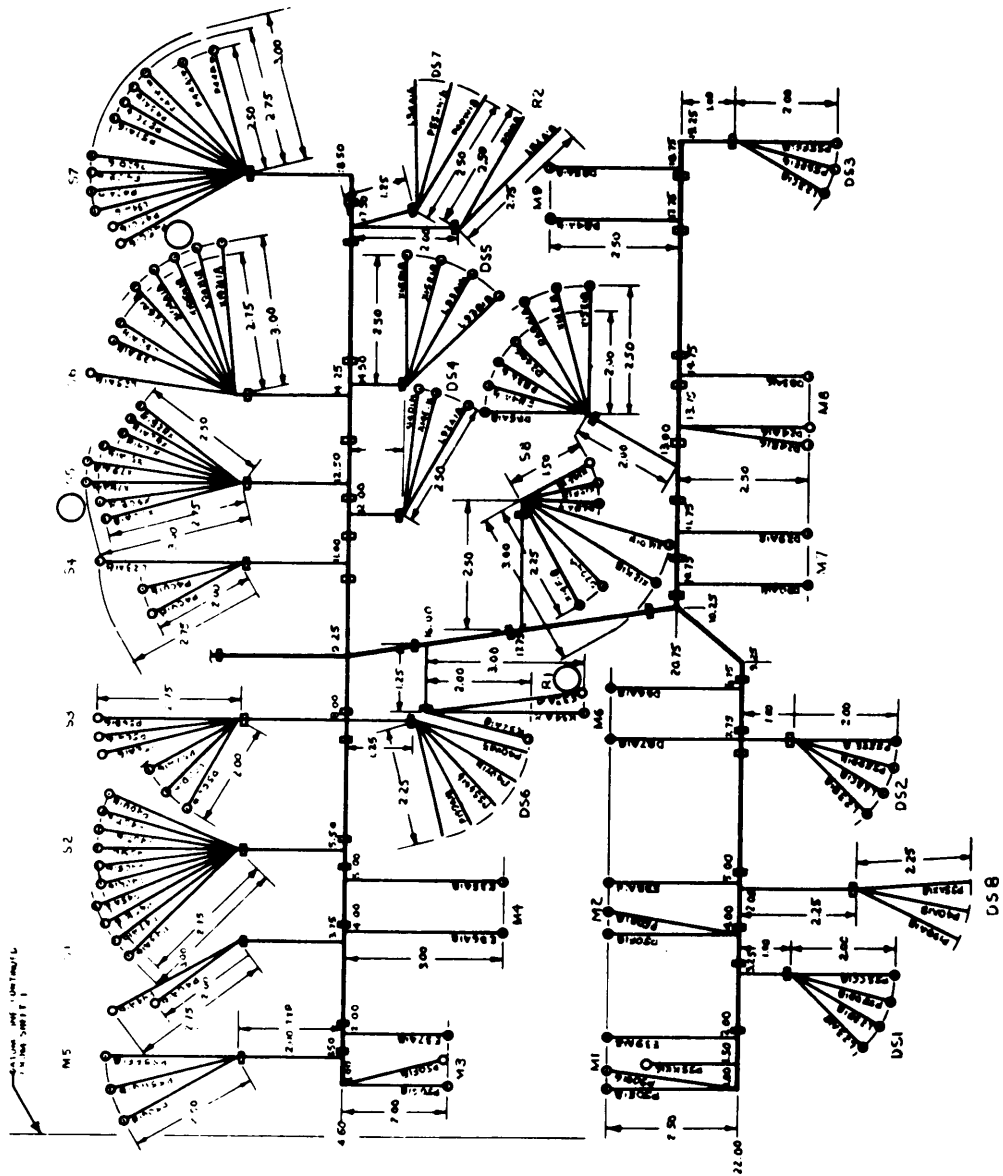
Control Cubicle Wiring Harness (Sheet 3 of 3) Drawing No. 69-677
